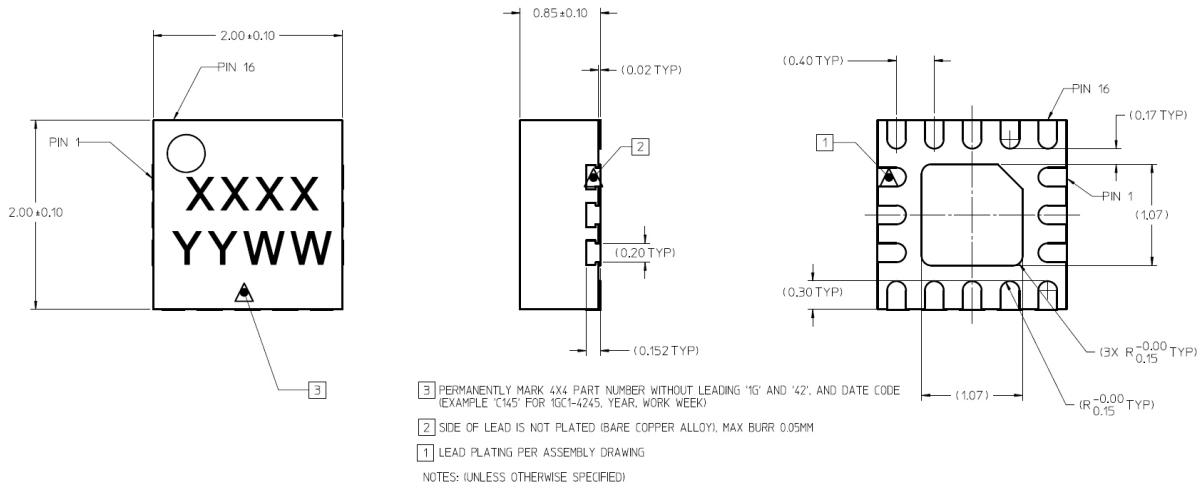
TC621P Dimension Drawing (dimensions in mm)
